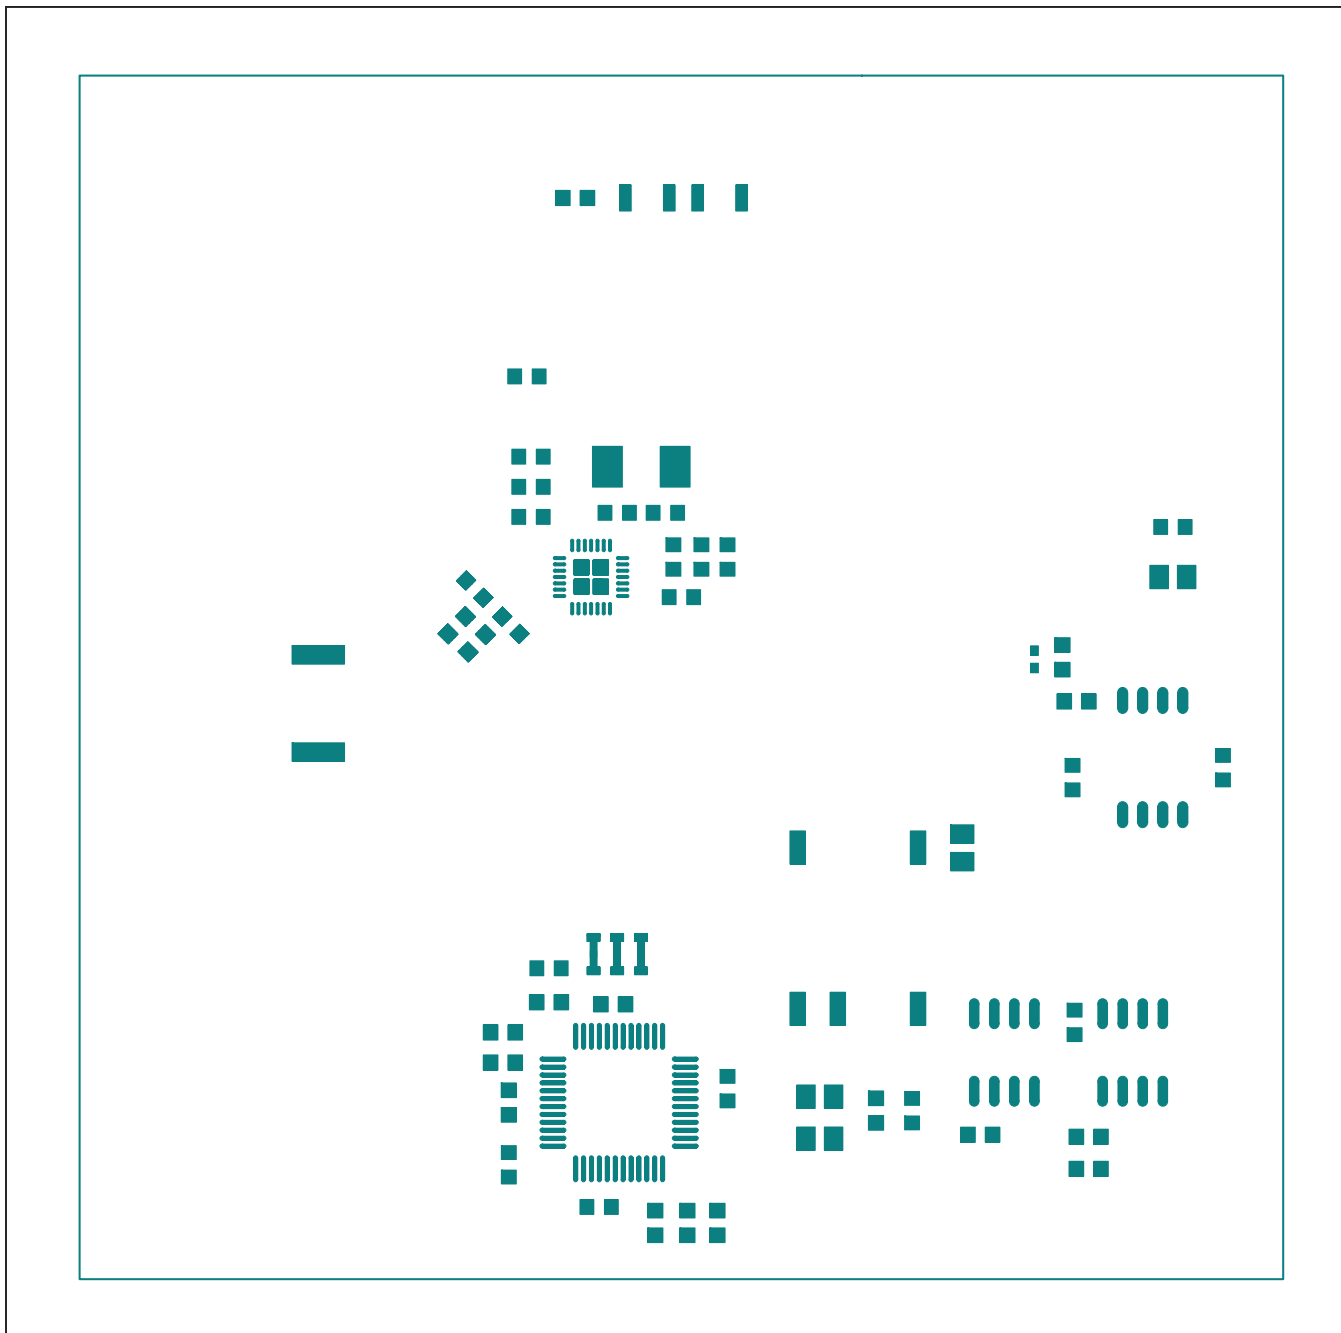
MAX71020A EV Board Layout—Solder Paste Top
